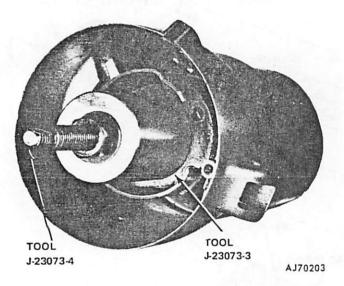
J-44 Pulling Shift Tube into Shift Bowl
